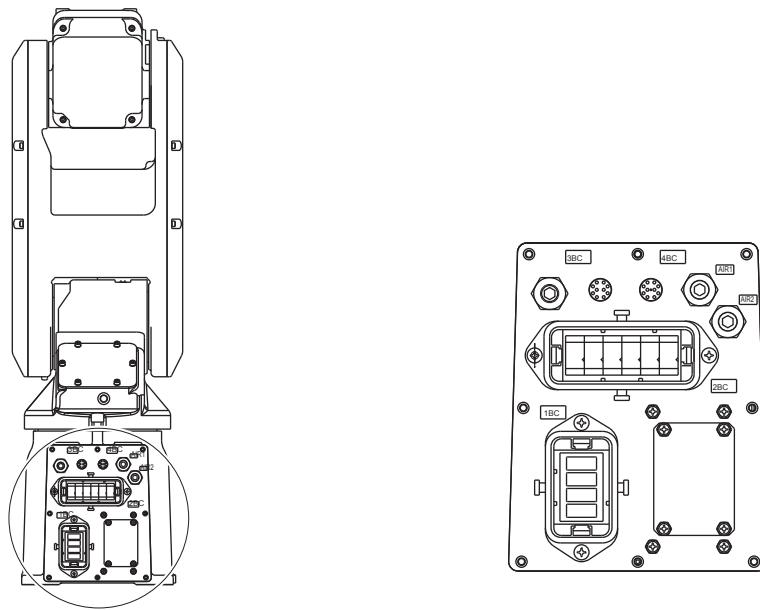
(b): Manipulator Cable Connection (DX100 Side)
